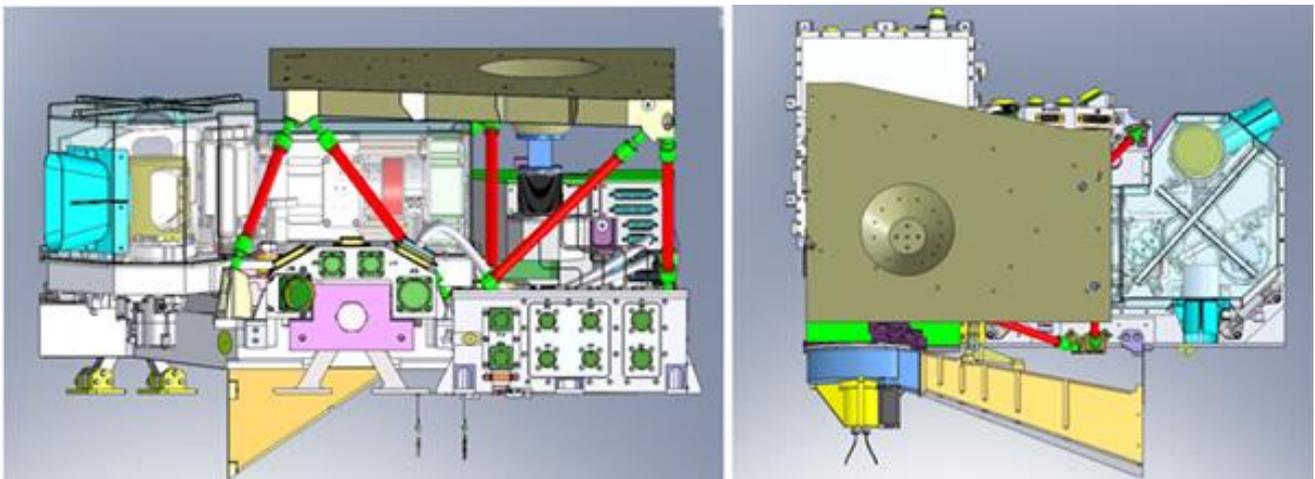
MSI optical bench module (OBM), front view (left), plan view (right)
